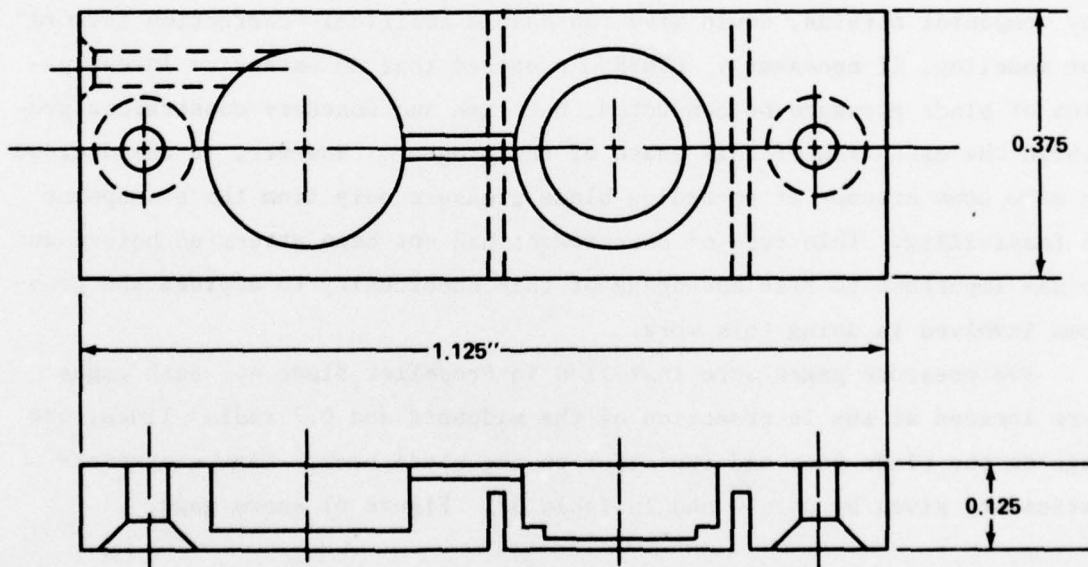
Details of the Bikini Pressure Gage (Adapted from NSRDC Engineering Drawing E-3076-1)
